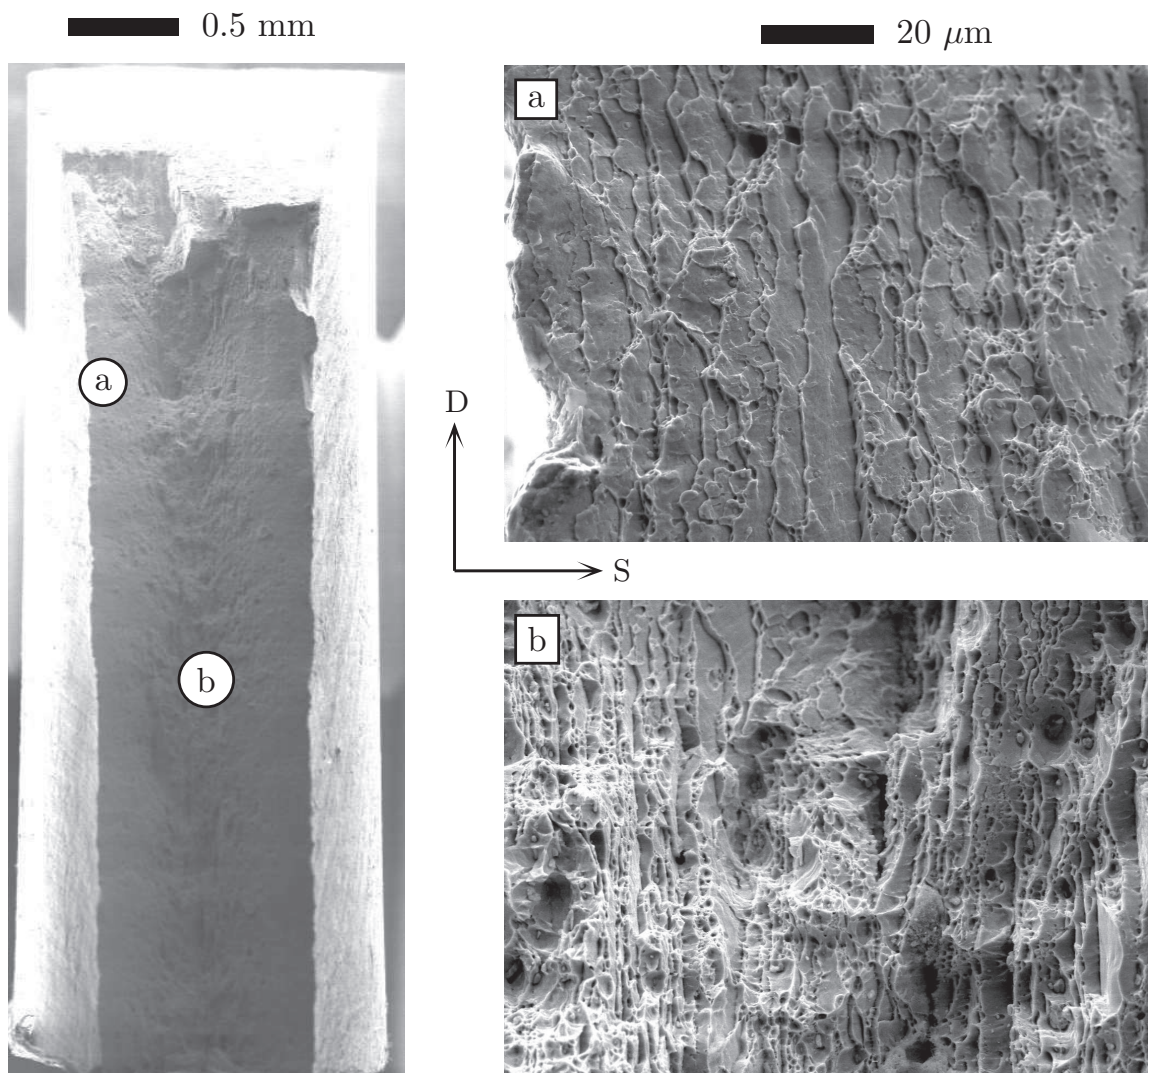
Smooth tensile specimen fracture surface of T8F₆₂ material in D-loading.
